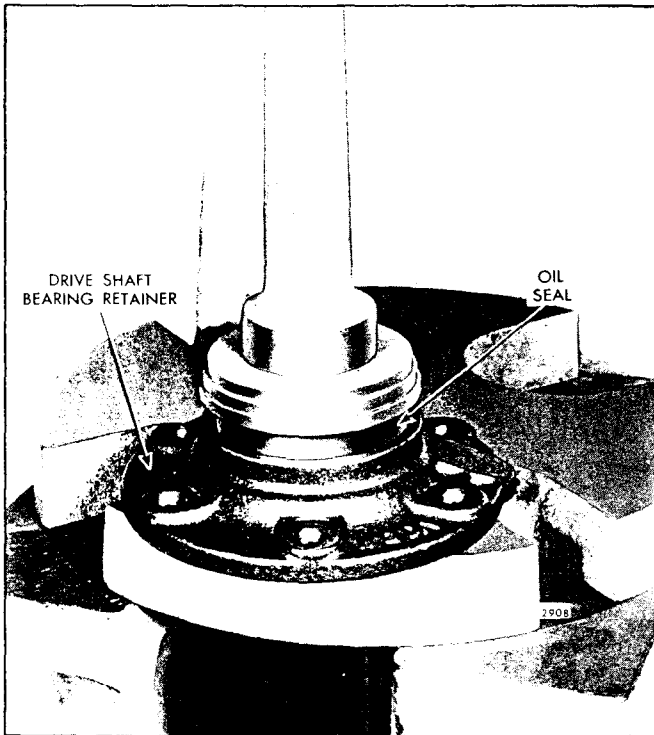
Installing Oil Seal in Drive Shaft Bearing Retainer
